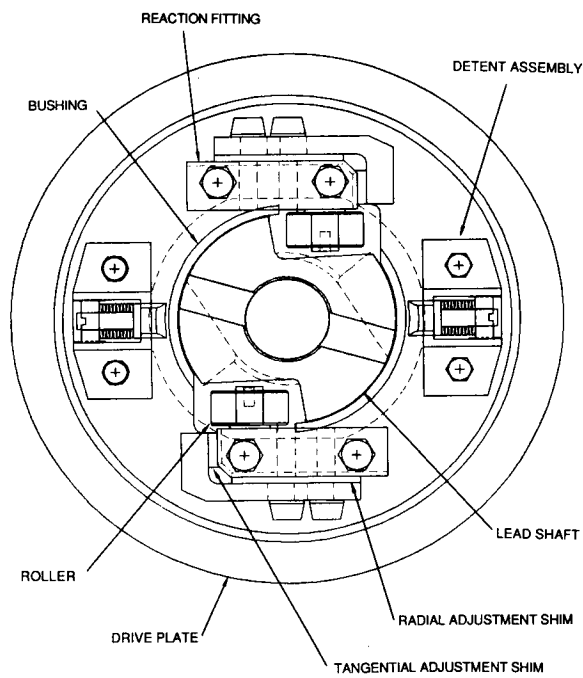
SPIN EJECTOR ASSEMBLY - TOP VIEW
